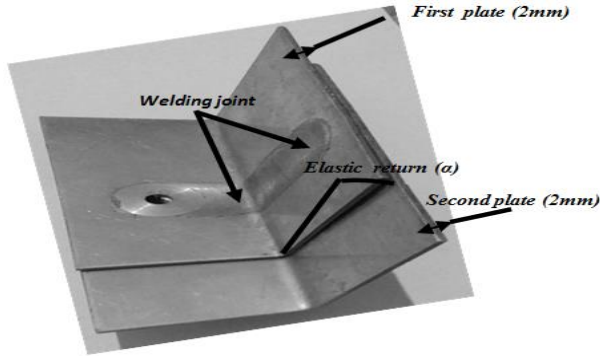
Folding of two welded sheets using FSW.
